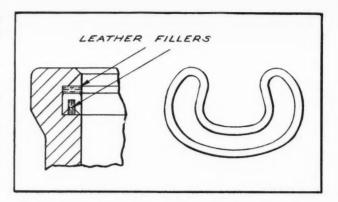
Partial section through a cylinder, showing U-packing with shoulder pad and filler. At right is folded form recommended for installing U-packing
